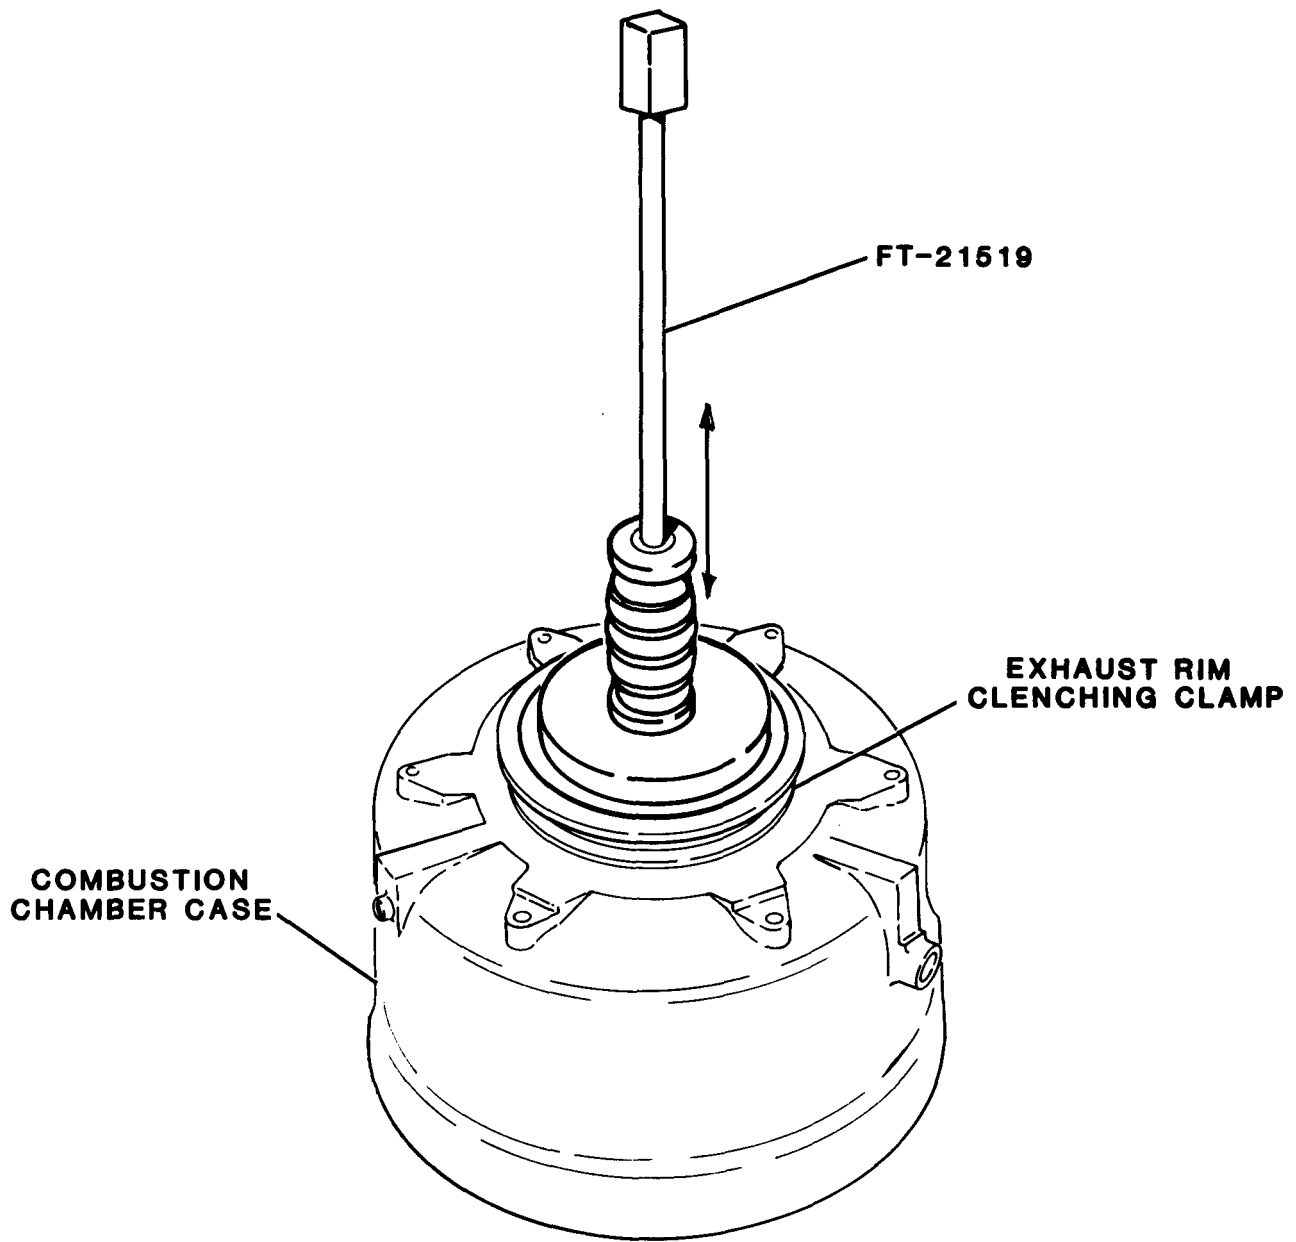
Removing Combustion Chamber Case Using Fabricated Tool FT-21519
